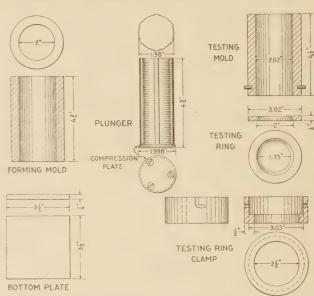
DETAILS OF FORMING AND TESTING MOLDS, PLUNGER, TESTING RING, AND RING CLAMP.
